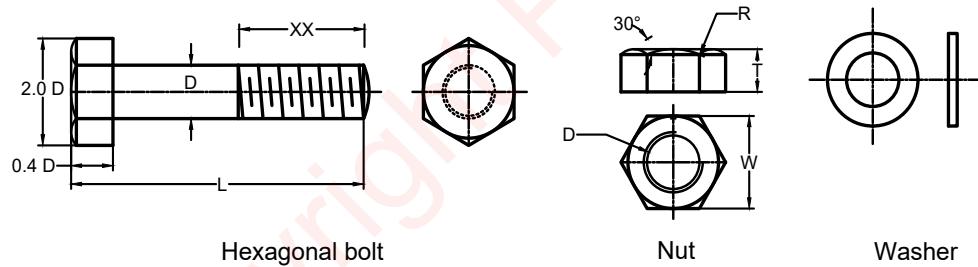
Detailed drawing of hexagonal bolt, nut and washer
